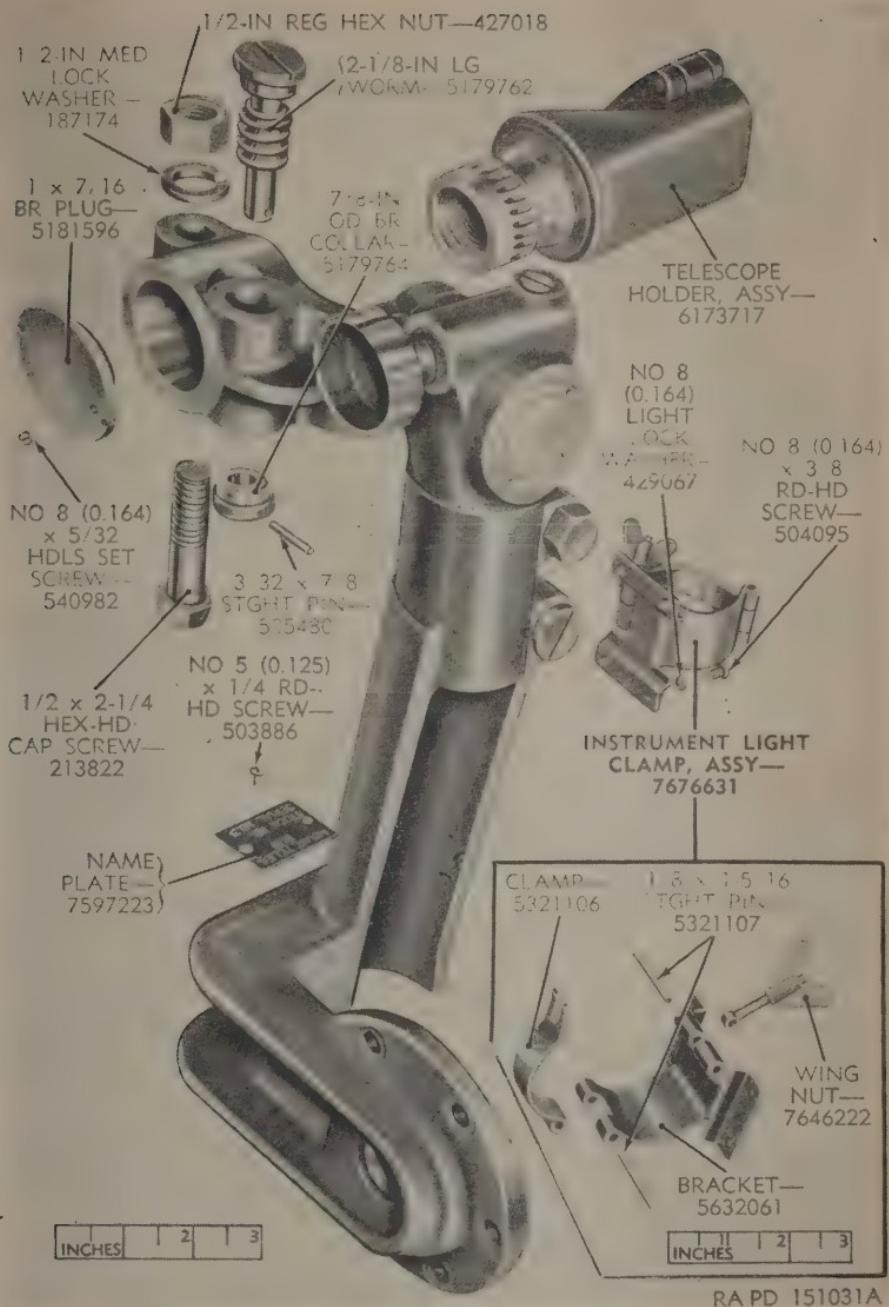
Telescope mount M31—removal of the major assemblies—exploded view.
